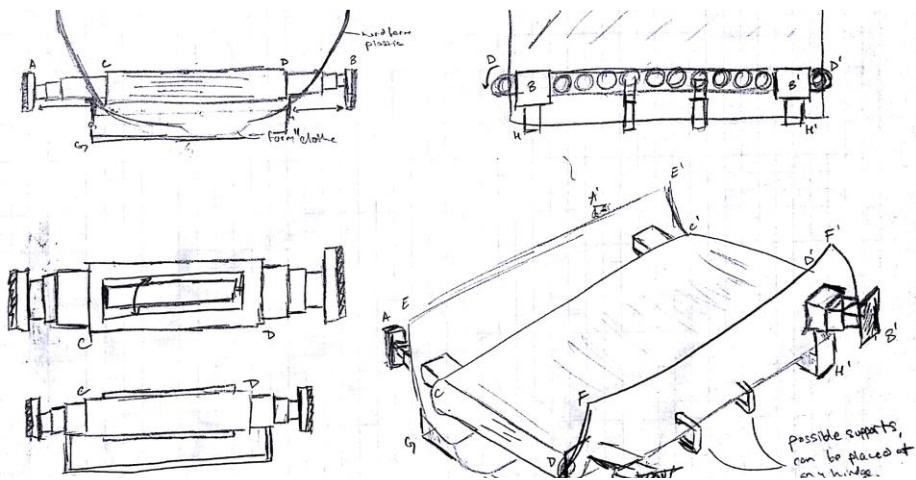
Conveyor Belt Rollout, CBR, concept design sketch
